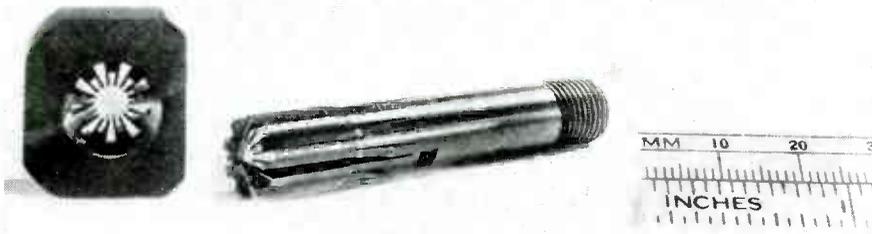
1.25 cm anode with hob used to produce it. The hob is pressed into a copper blank
